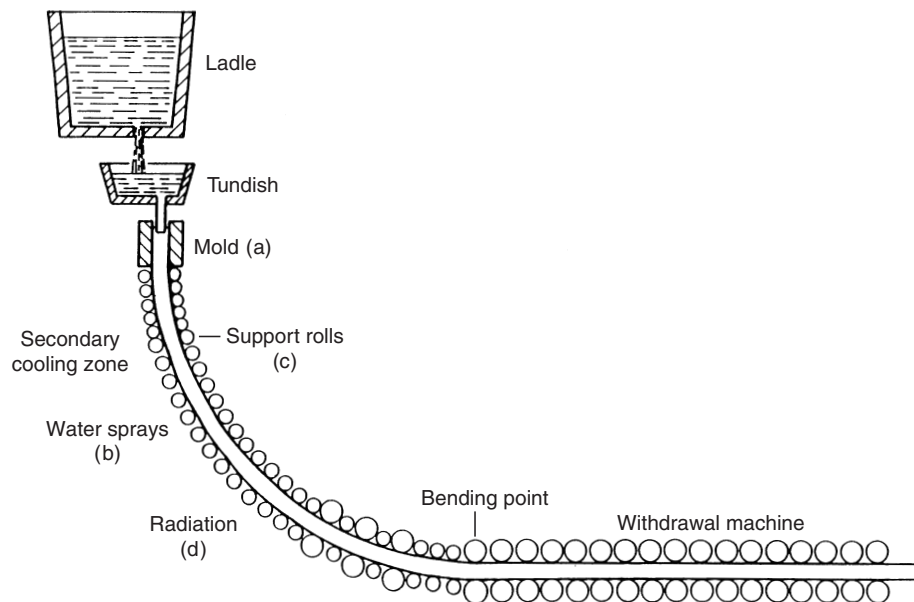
Different zones of heat transfer in a continuous casting machine.
